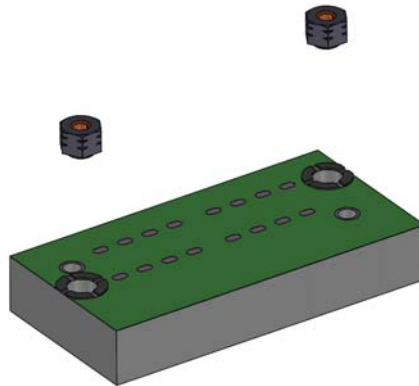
SMT NUTS AND THE BACK OF THE PCB micro-LO FOOTPRINT. THE GREEN AREA IS SOLDER MASK. SOLDER PASTE IS APPLIED BY STENCIL OR MANUALLY AROUND THE MOUNTING HOLES.
